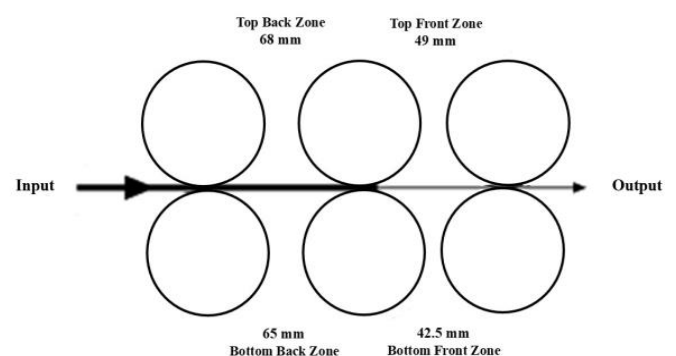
(a): Closer roller gauge setting in Ring frame machine
